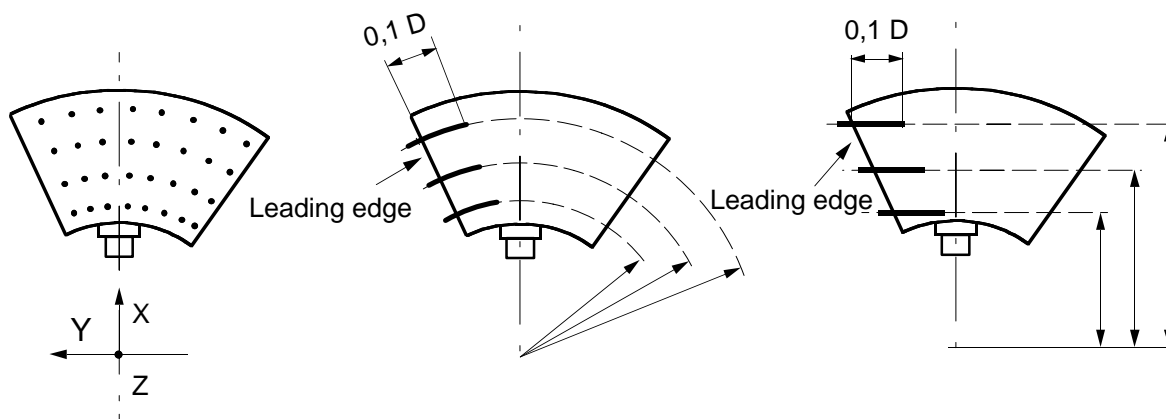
Runner/impeller of axial flow machine. Example of locations for blade profile measuring sections or measuring points
